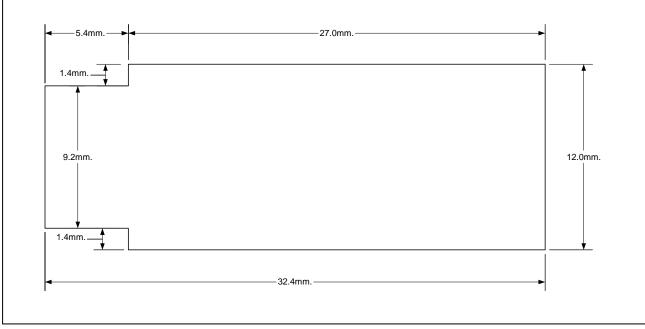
Board Dimensions See SFP MSA for additional dimensions.
